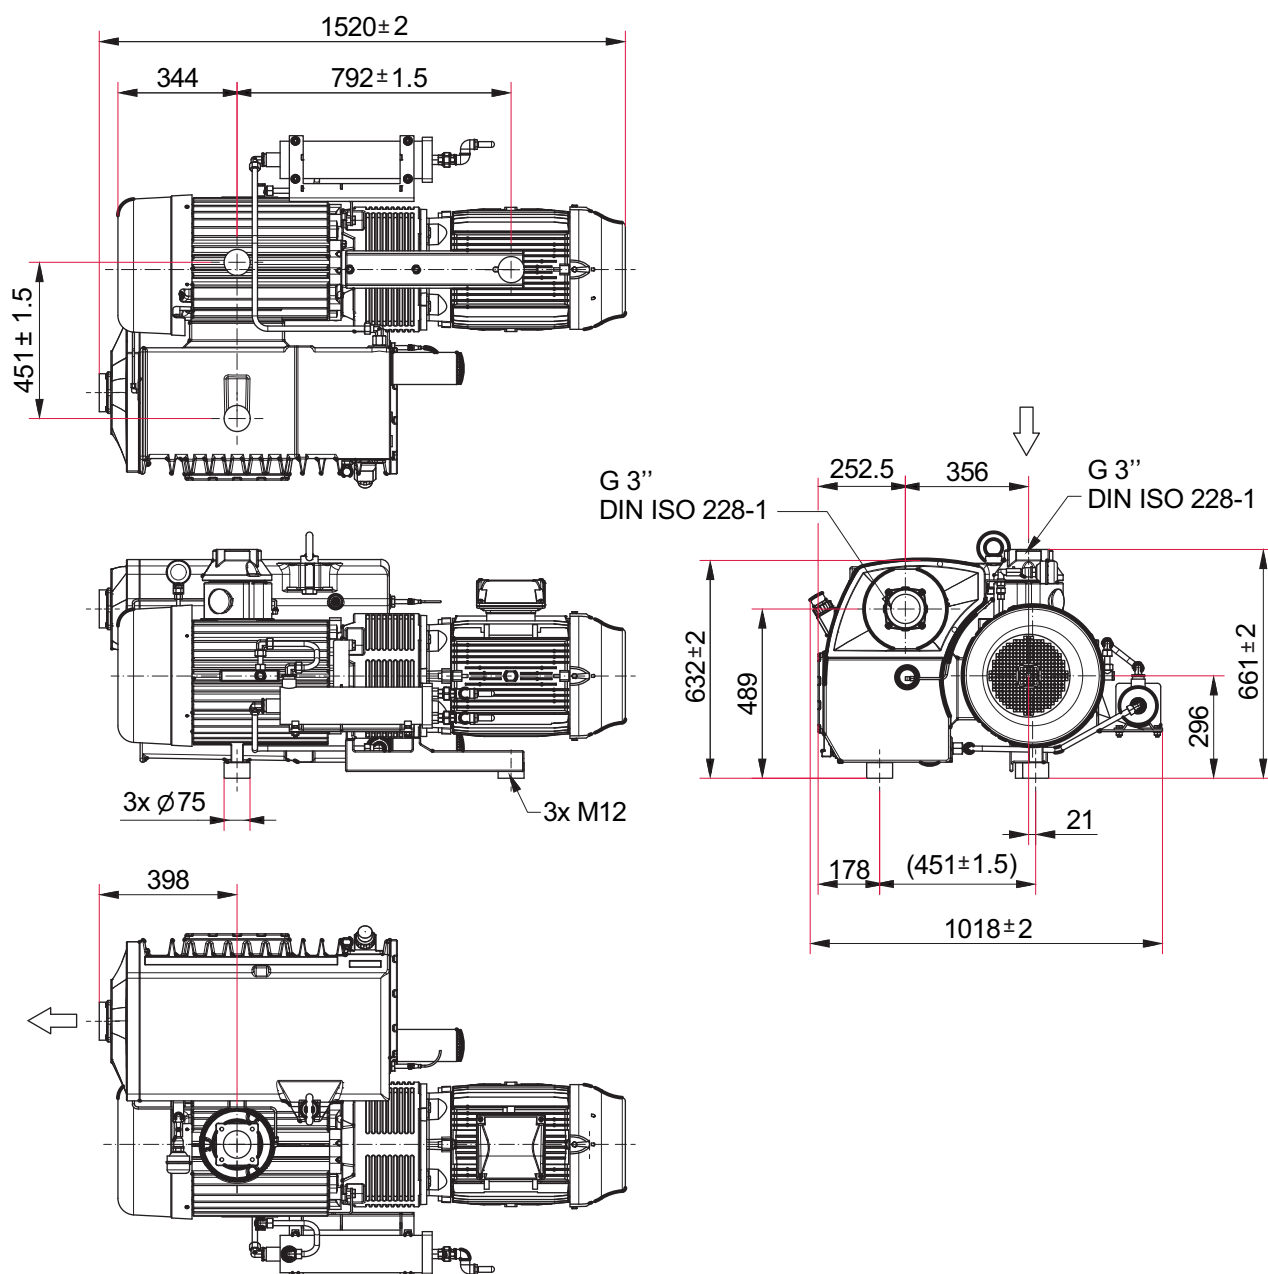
Dimensions Hena 631 S with water cooling | Three phase motor IE3
